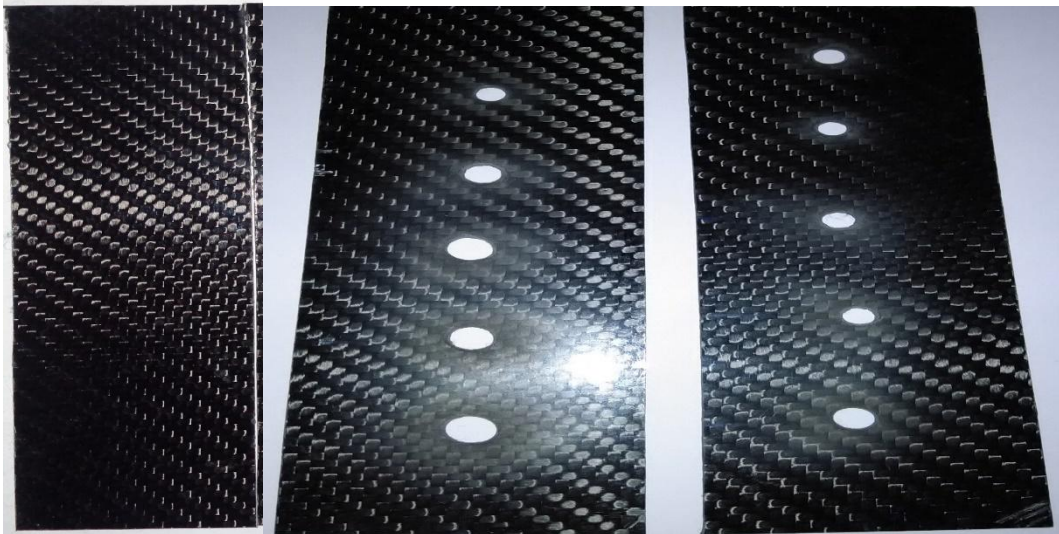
CFRP sheets before and after drilling by Abrasive jet machining
